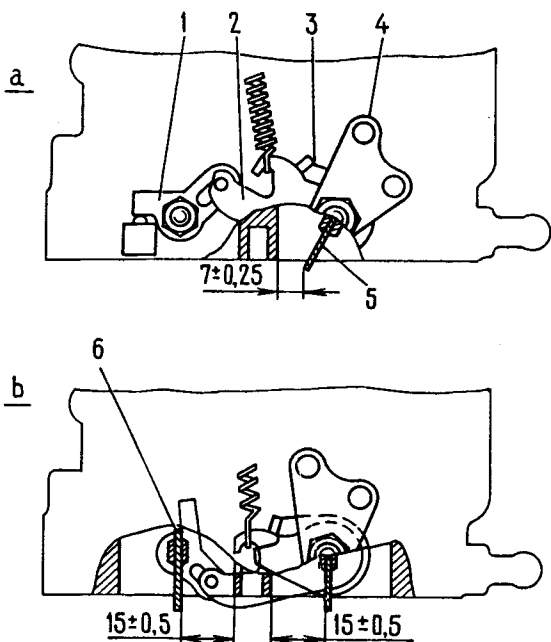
Adjusting Full and Partial Opening of Throttle Valves in Carburettor 2106-1107010:
